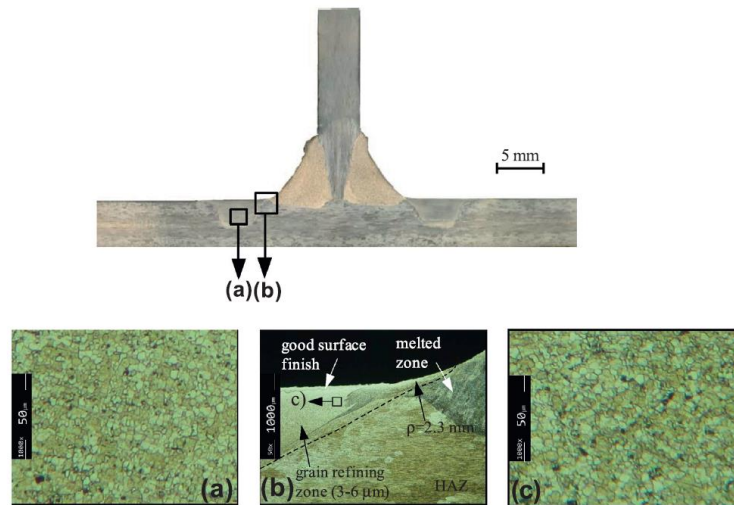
Cross section metallographic analysis of a post processed MIG weld using tool B ( $\rho = 2.3$  mm): (a) nugget zone; (b) toe of a post-processed weld; and (c) refined zone at weld toe.
